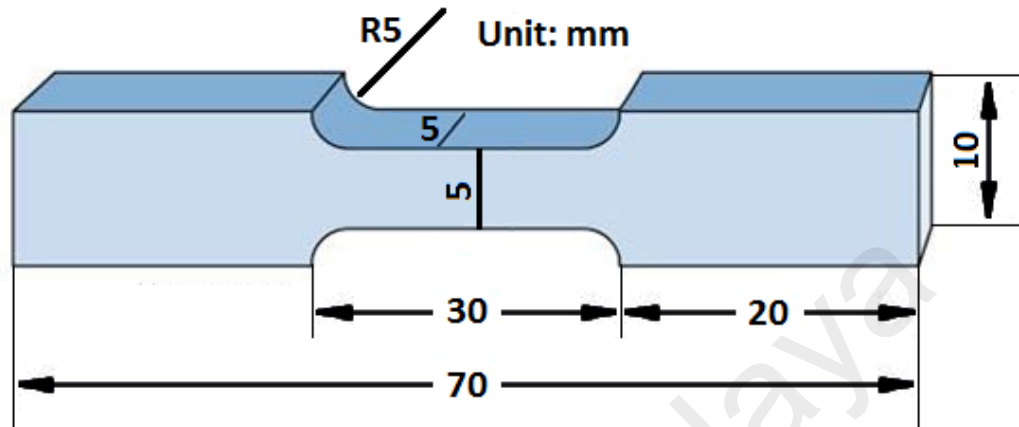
Dimensions of the dog-bone shape tensile specimen
